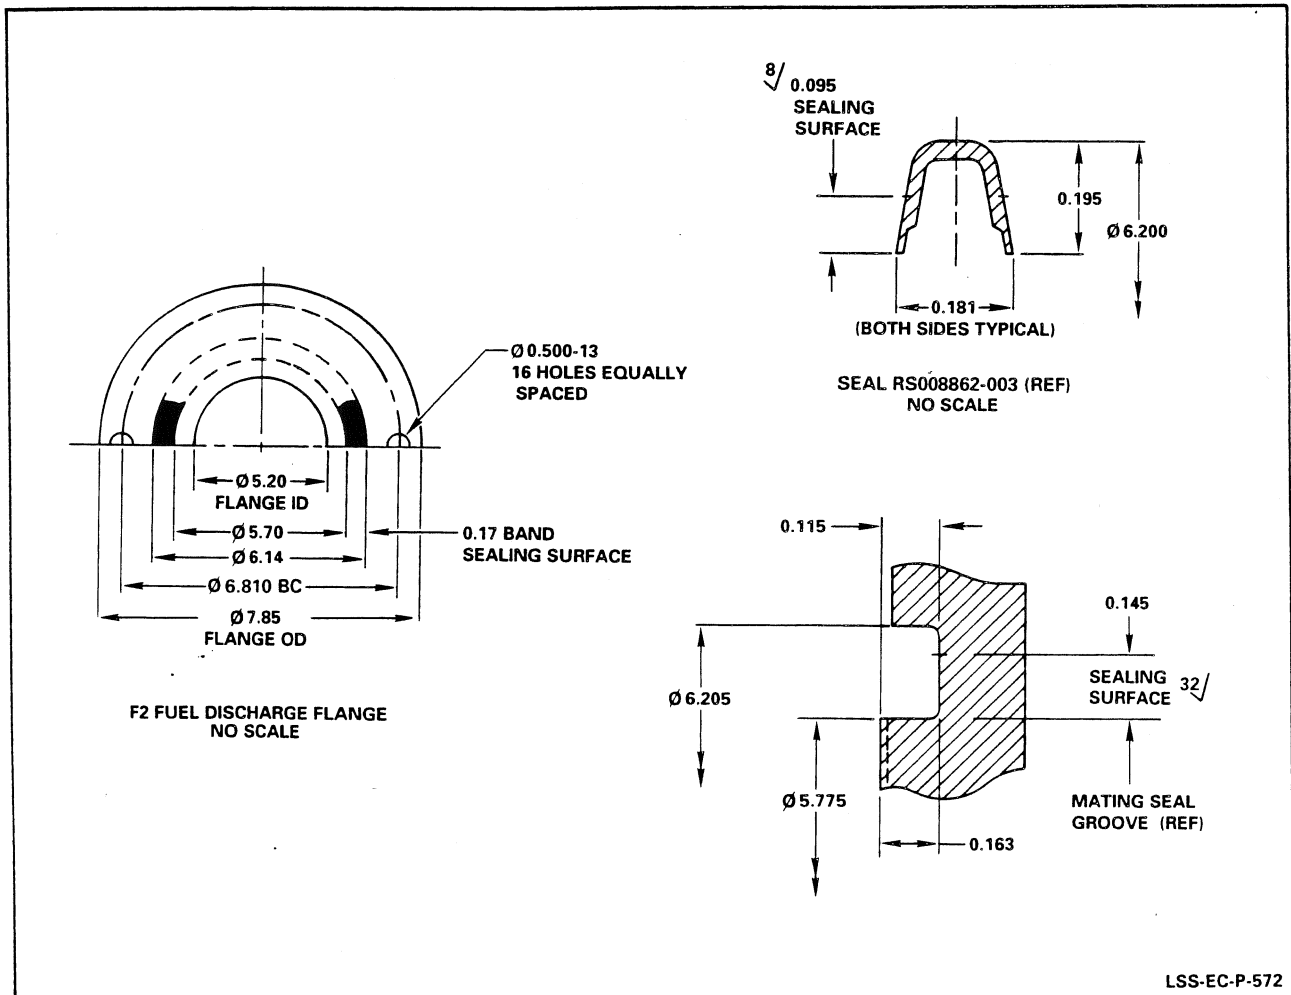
F2 Fuel Discharge Flange Sealing Surfaces
